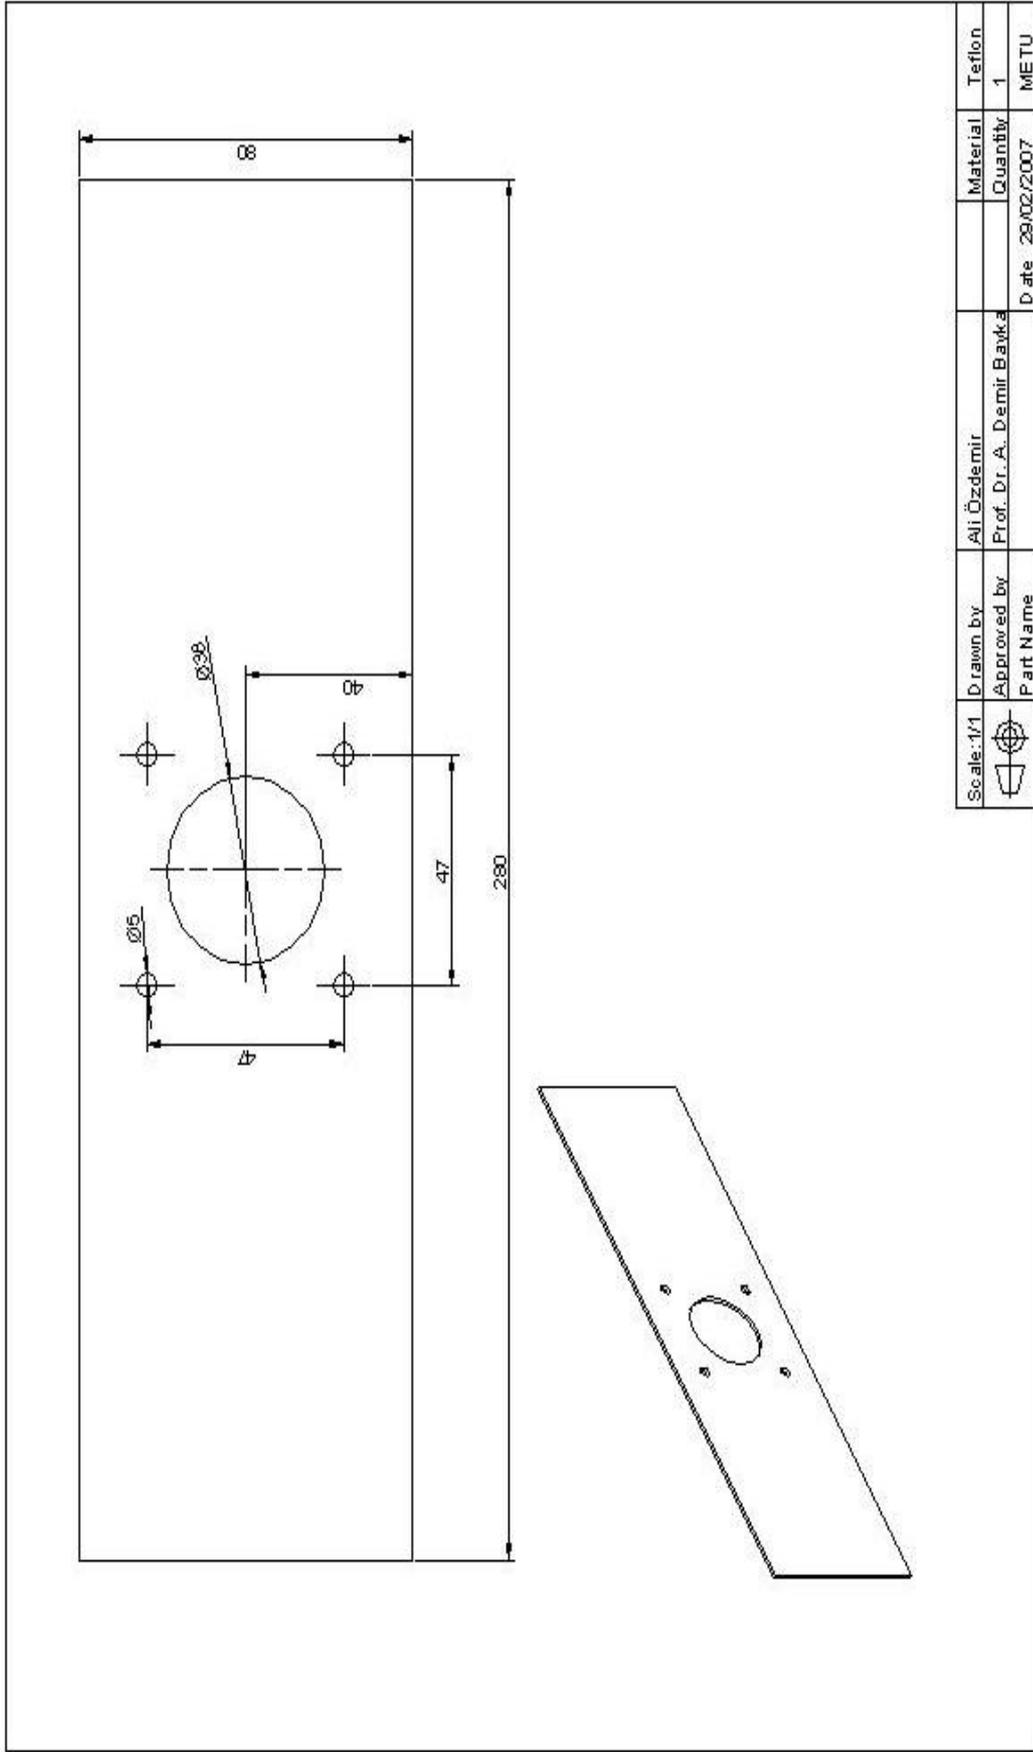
Technical Drawing of the Support of :Dilution Tunnel Stepper Motor
